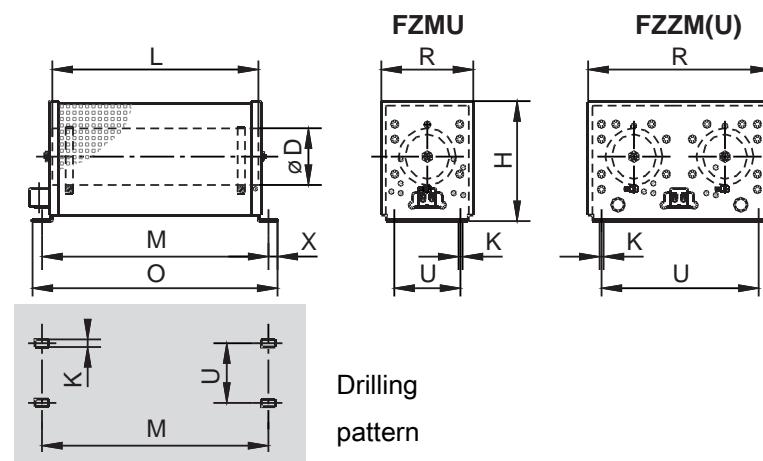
FZMU, FZZMU 400×65 dimensional drawing
